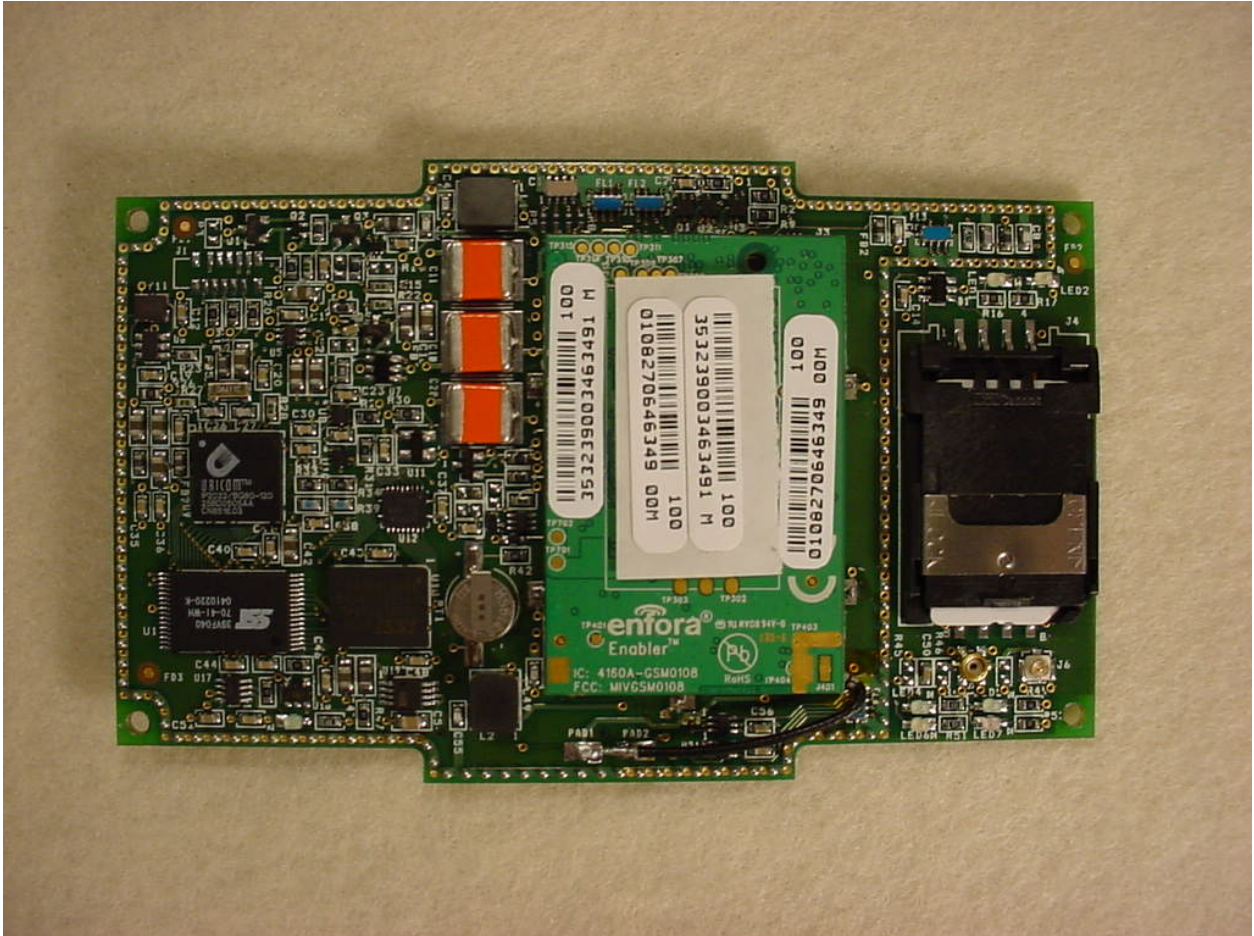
Internal – Mezzanine GPRS Board Front w/o Shields (GPRS & GPRS + Ethernet Sub Assemblies Only)
